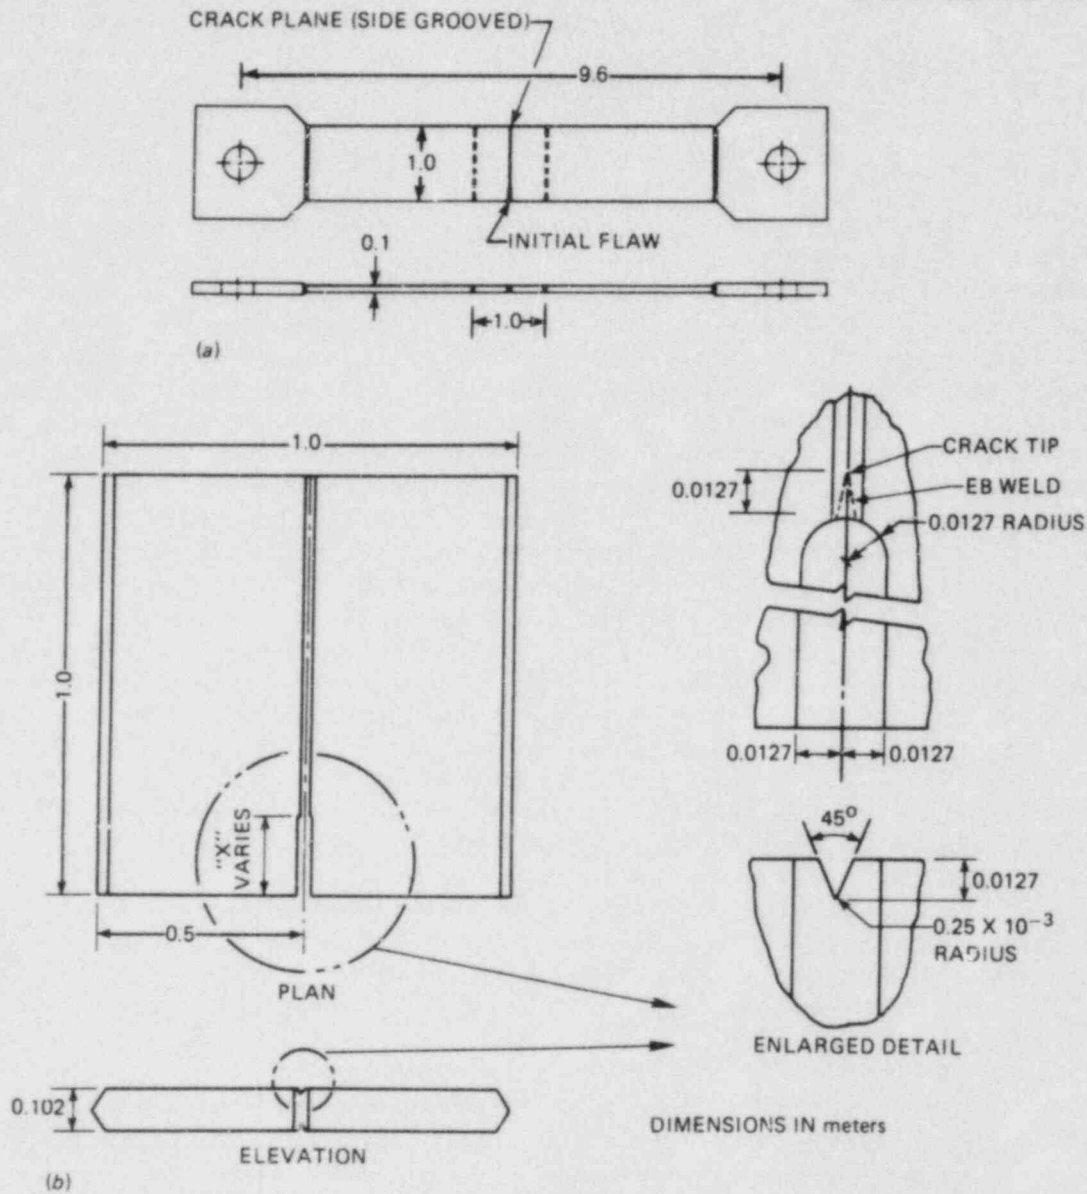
Wide-plate crack-arrest specimen and pull-plate assembly. (a) Schematic of assembly, (b) detail of test specimen.
